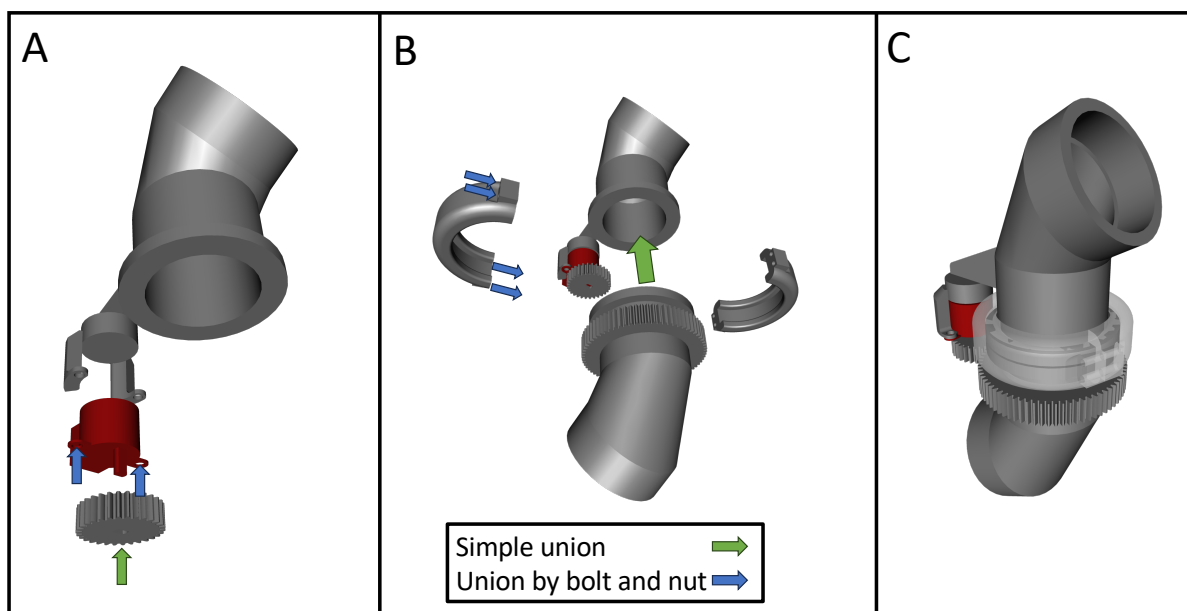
Assembly of the lower joint: A) Insert the motor shaft into the JointPinion, then fasten the motor to the linking part of Elbow2 using 2 M3x10mm screws. B) Align Elbow2 and Elbow3 so that they touch and the gears engage, then assemble two HalfClamp parts with 4 M3x25mm screws. C) Transparency view of the full lower joint assembly.
